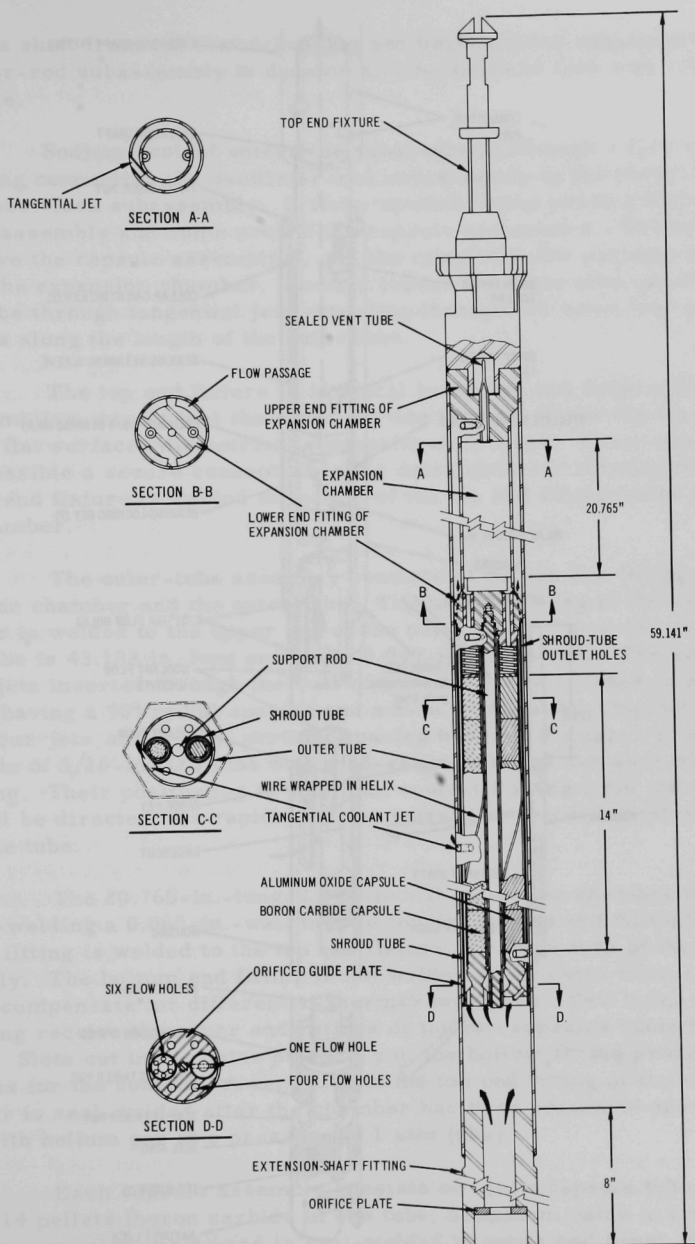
Details of Mark IIB Oscillator-rod Subassembly
